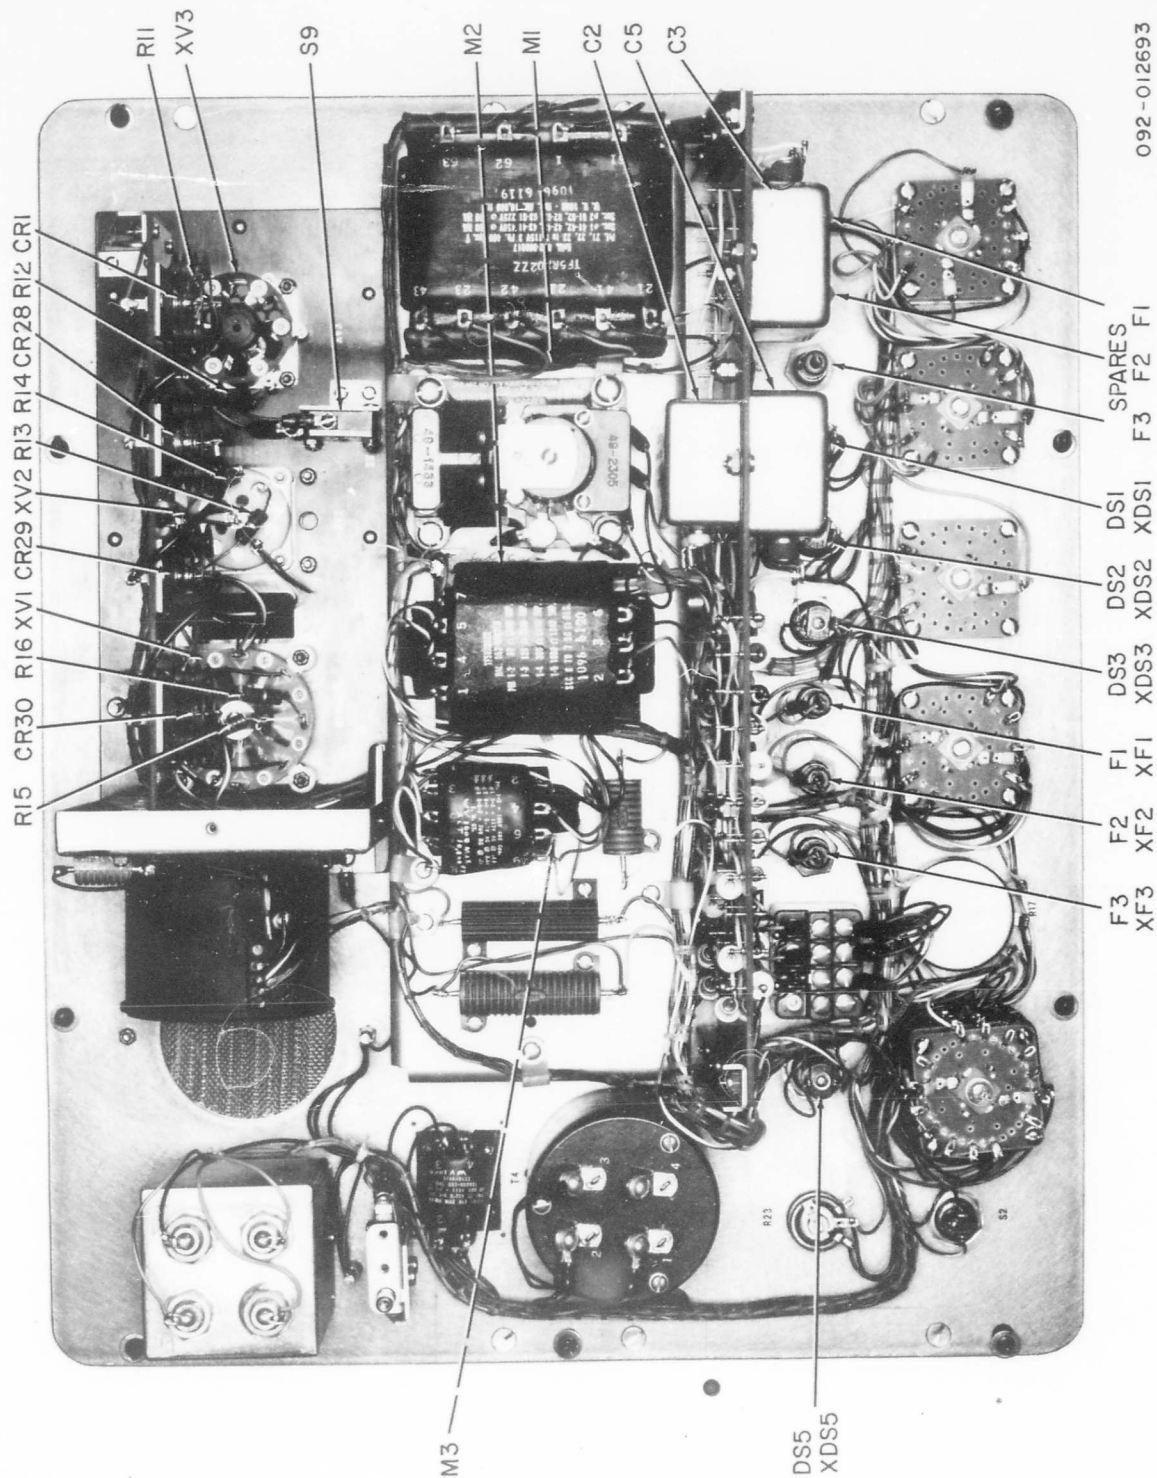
Rear of Front Panel Assembly, Top View (Without Tube Socket Cover).
